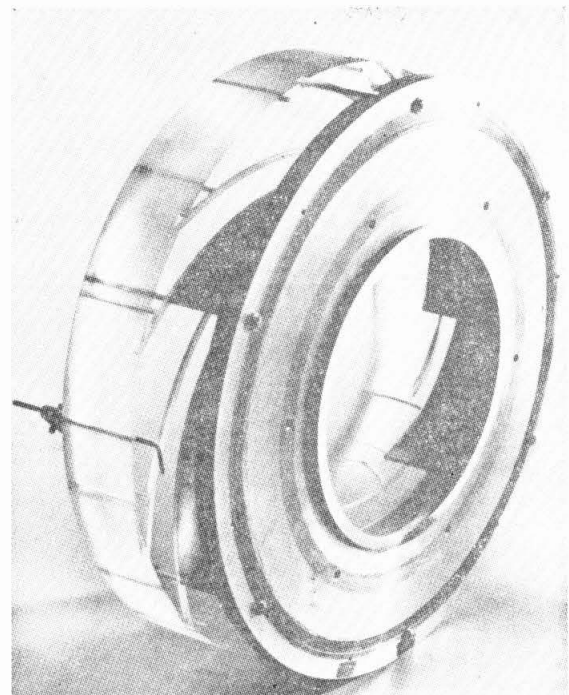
VIEW OF ASSEMBLED TWO-DIMENSIONAL IMPELLER
